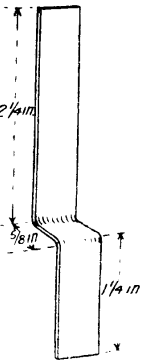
Brass strip is used for the contact arm, cut and bent to dimensions here given
